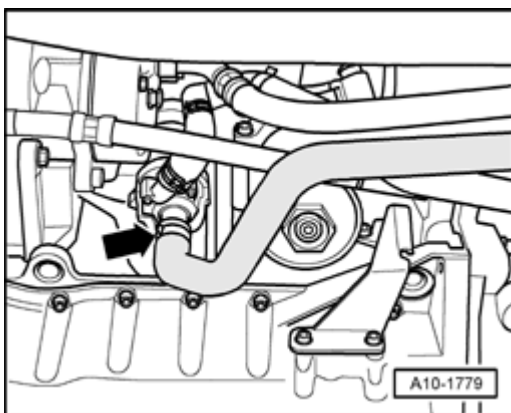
Removing/Installing Lower Coolant Hose At After-Run Coolant Pump -V51-
